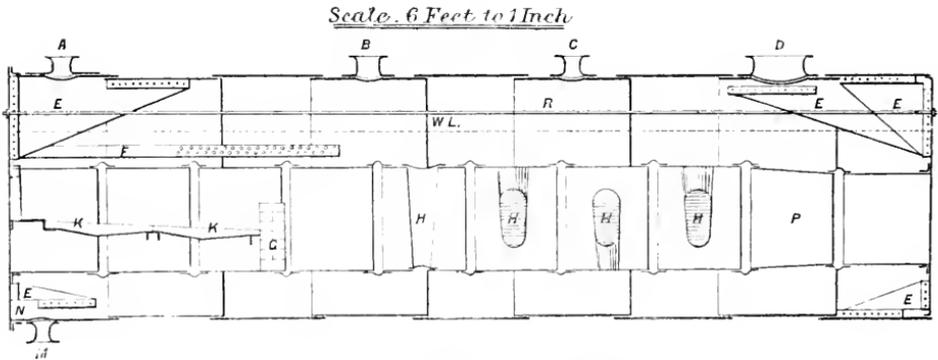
LONGITUDINAL SECTION OF CORNISH BOILER.
